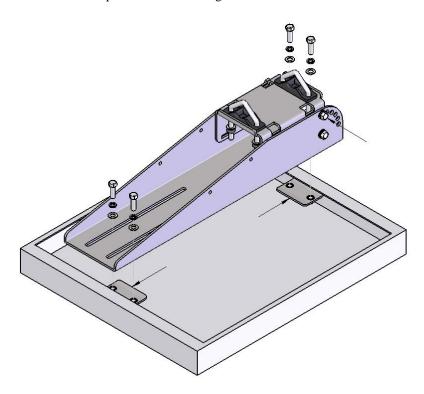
Assembly drawing for fitting the multi-mount bracket to a larger panel
